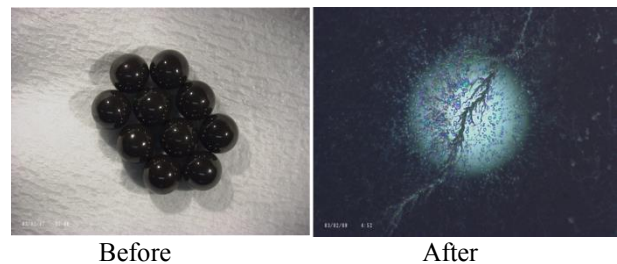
Bearing balls before and after the duration test. (LH₂ turbopump, 100,000 rpm, 120 min)
